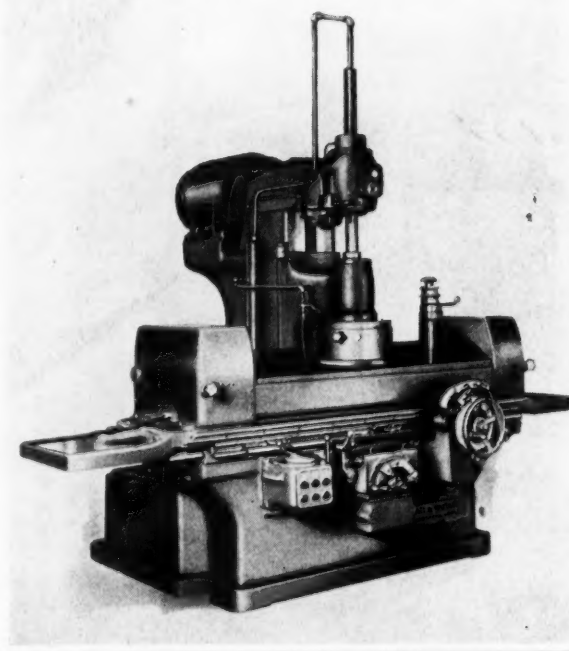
Pratt & Whitney Vertical Surface Grinder Equipped with Hydraulic Table Drive
